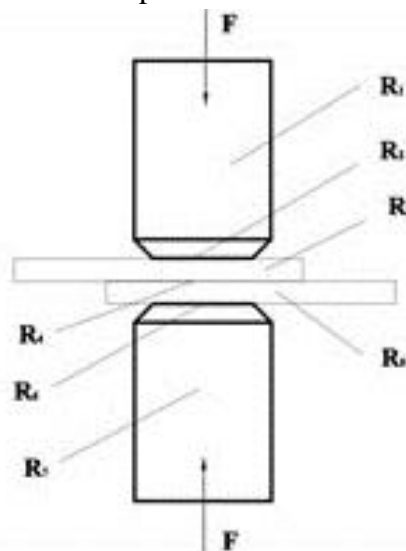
ohmic resistances in resistance spot welding [12]
